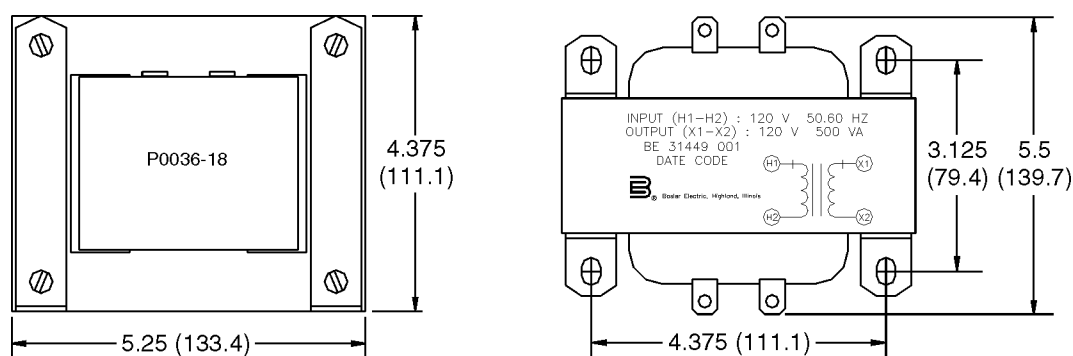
Isolation Transformer (BE31449001) Dimensions
